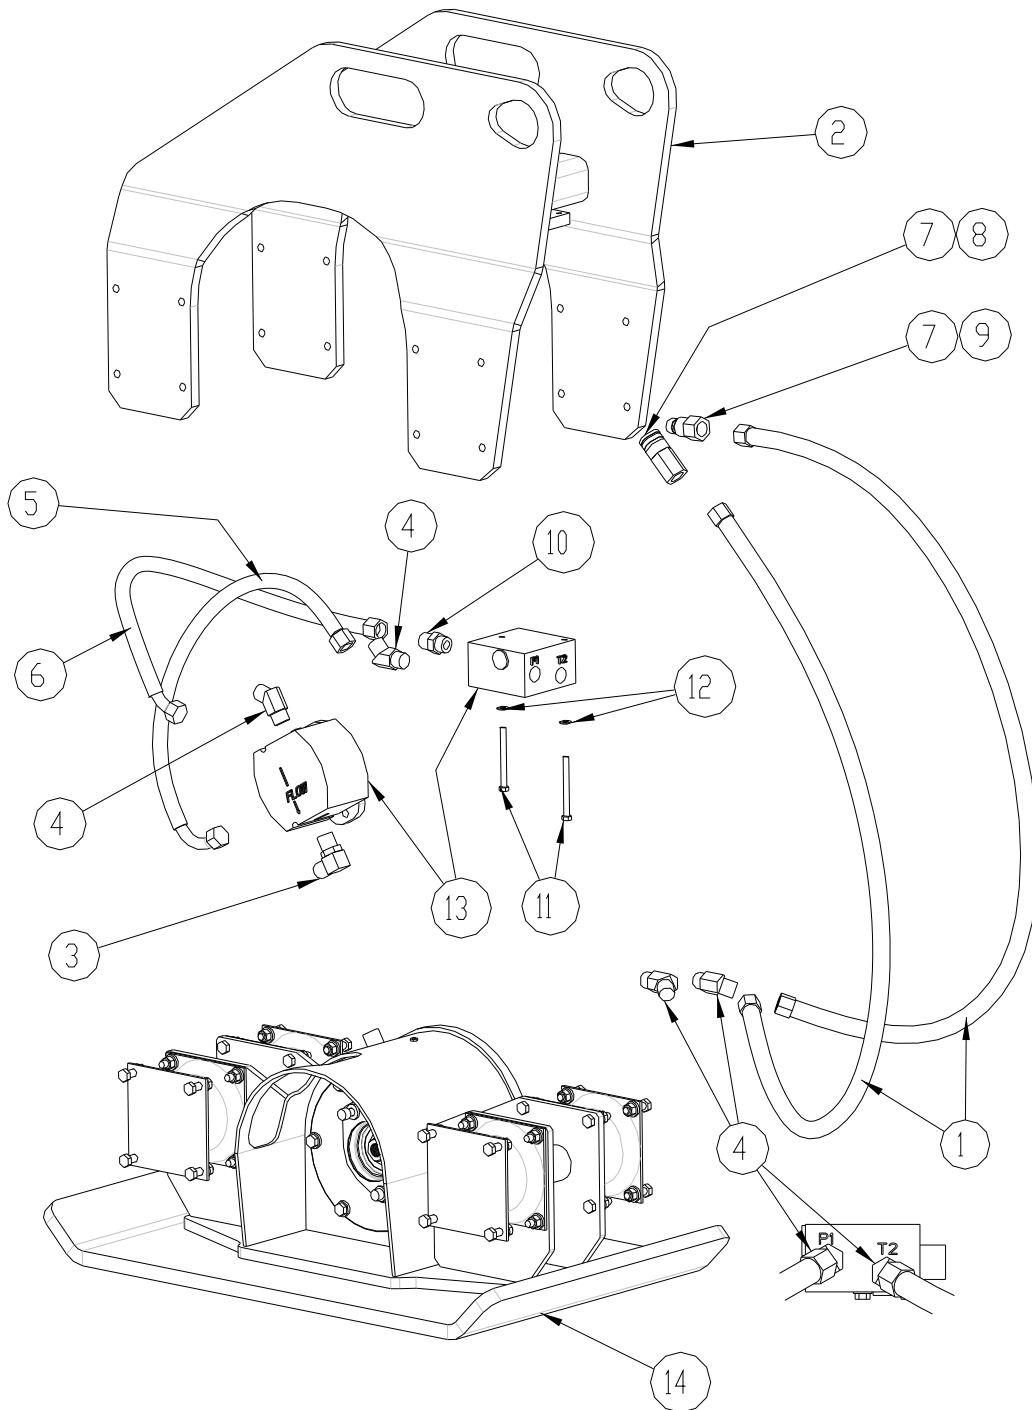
VMS V10 & V12 Mounting Frame Ho-Pac
